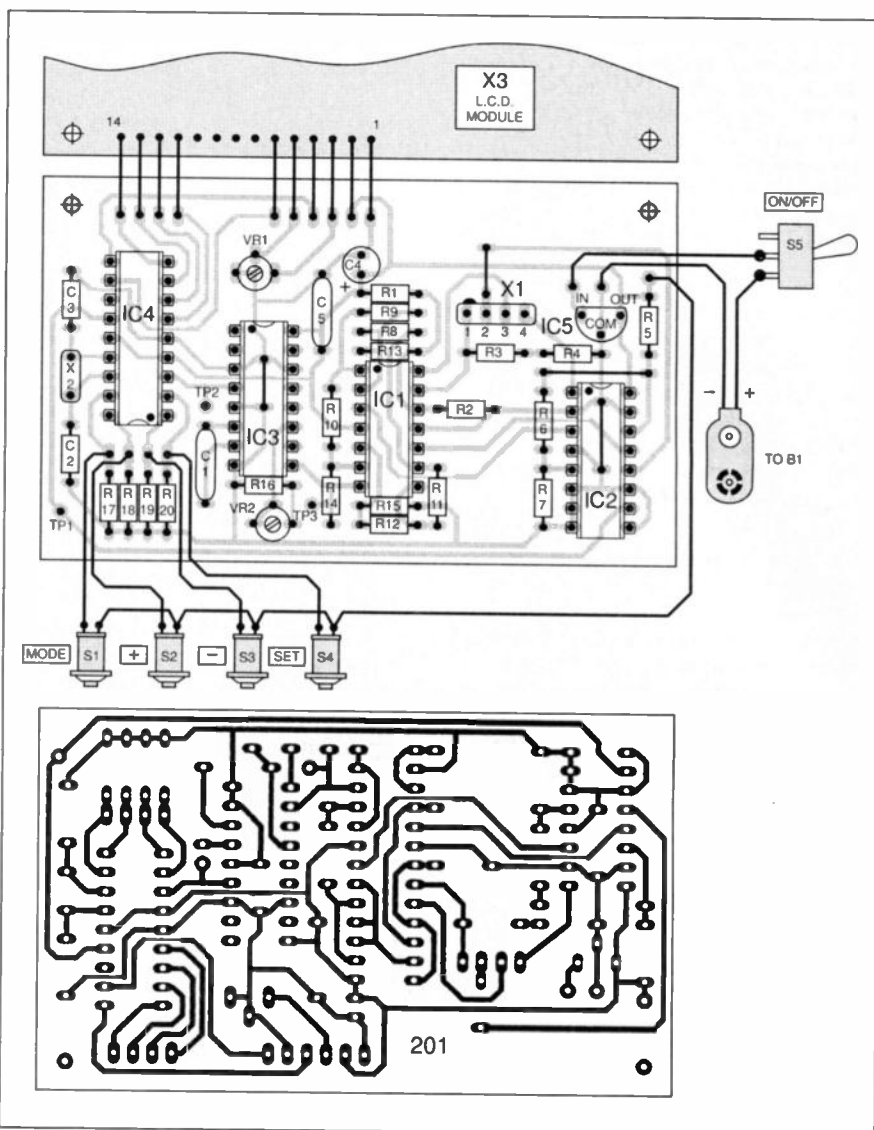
Printed circuit board component layout, off-board interwiring and full size copper foil master for the PIC Altimeter.
